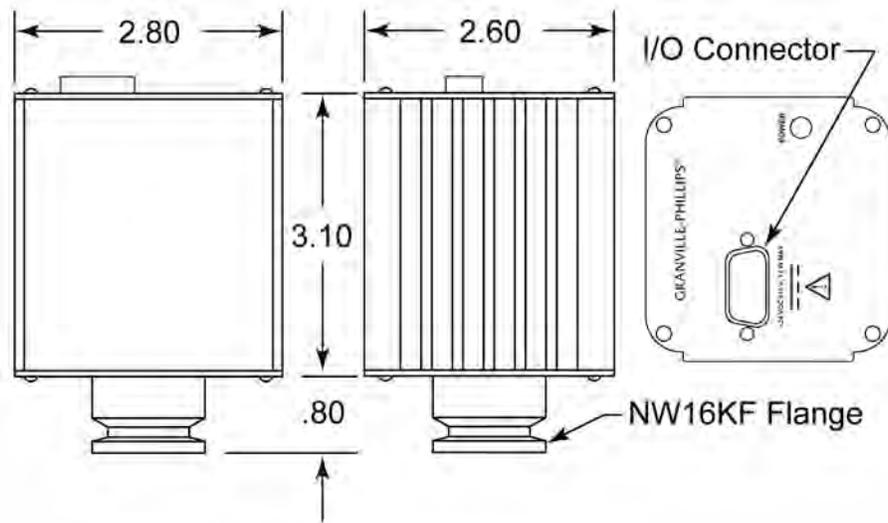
Series 342 & 343 Mini-Ion Gauge Dimensions
